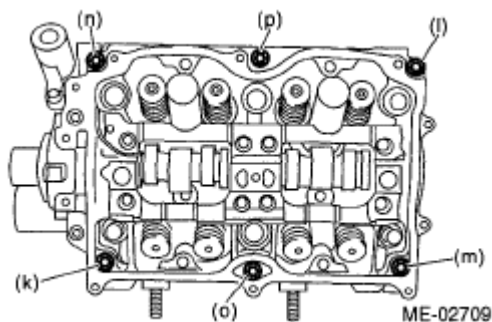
Removing Sequence Of Camshaft Cap Bolts
